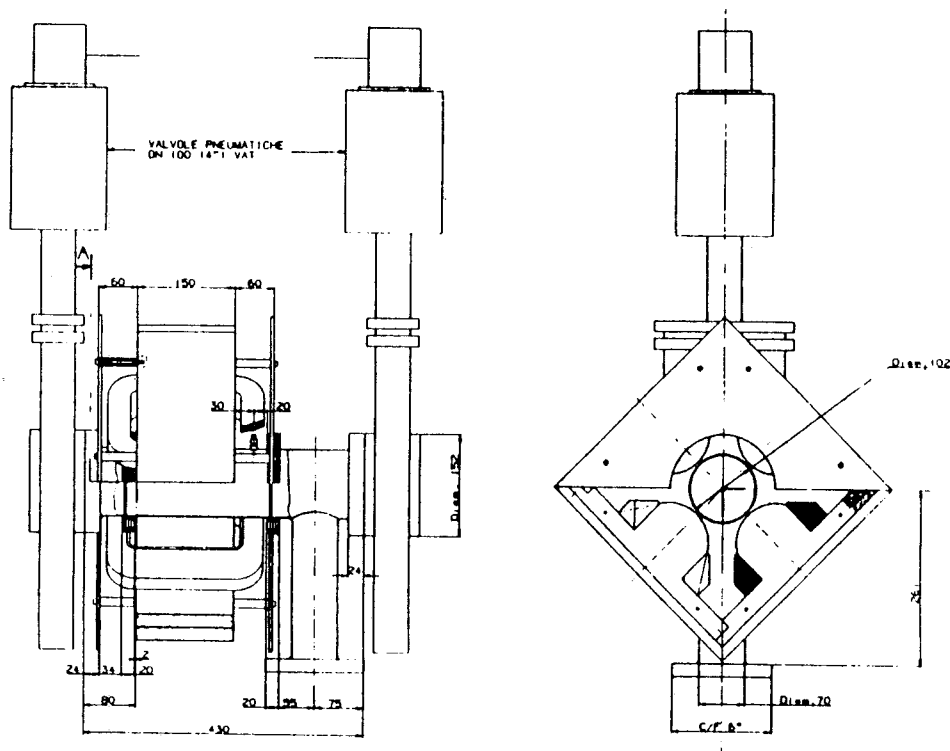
Layout of the connection assembly between two cryomodules of the sections L1 and L2.
